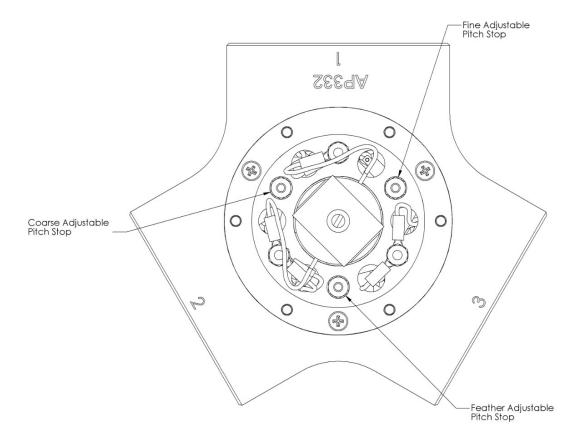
Location of Adjustable Pitch Stops on 3 bladed Propeller Hub Assembly (AP332 shown)
